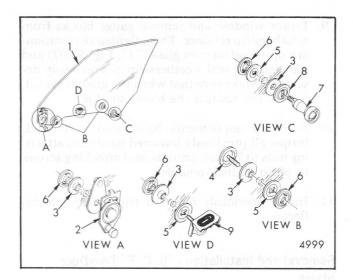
Front Door Window Assembly - "B and C-39, 49" and "C-69" Styles
